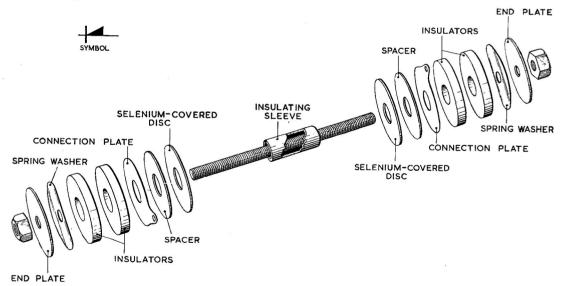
Fig. I. Exploded view of rectifier, Westinghouse, Type 5D2
